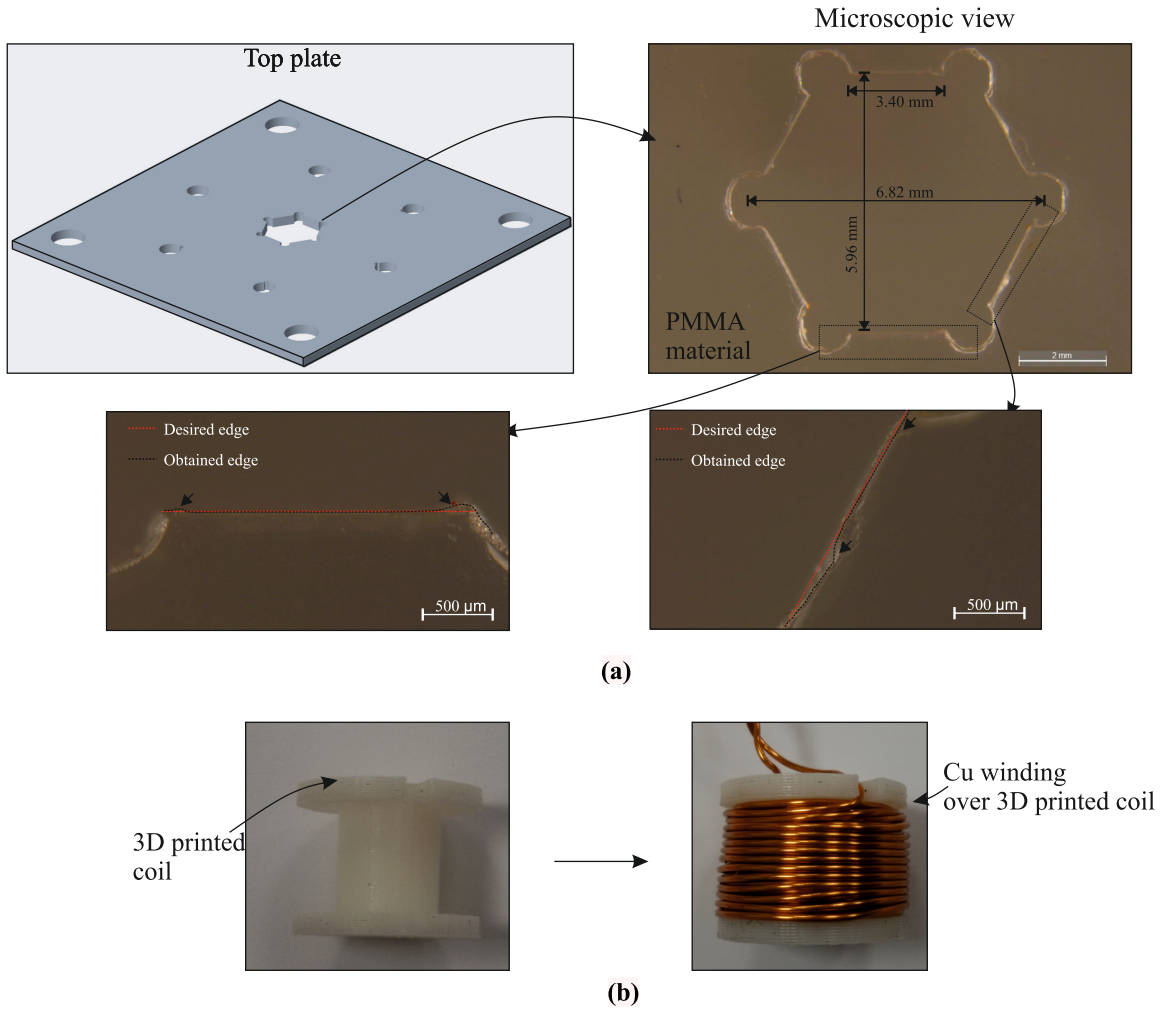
(a) PMMA deformation due to laser cutting technique for the Top plate. (b) Assembly of a 3D printed air-core electromagnetic coil.
